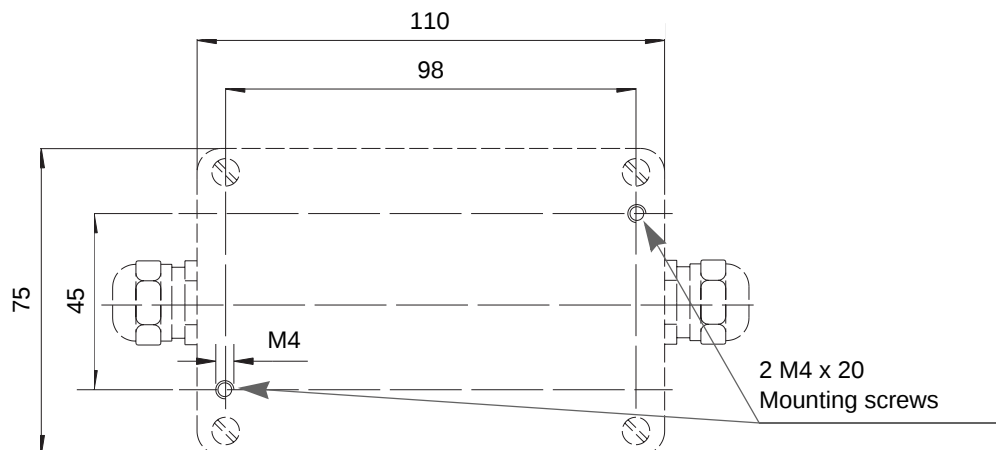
Example showing mounting dimensions for a JB 116 junction box
